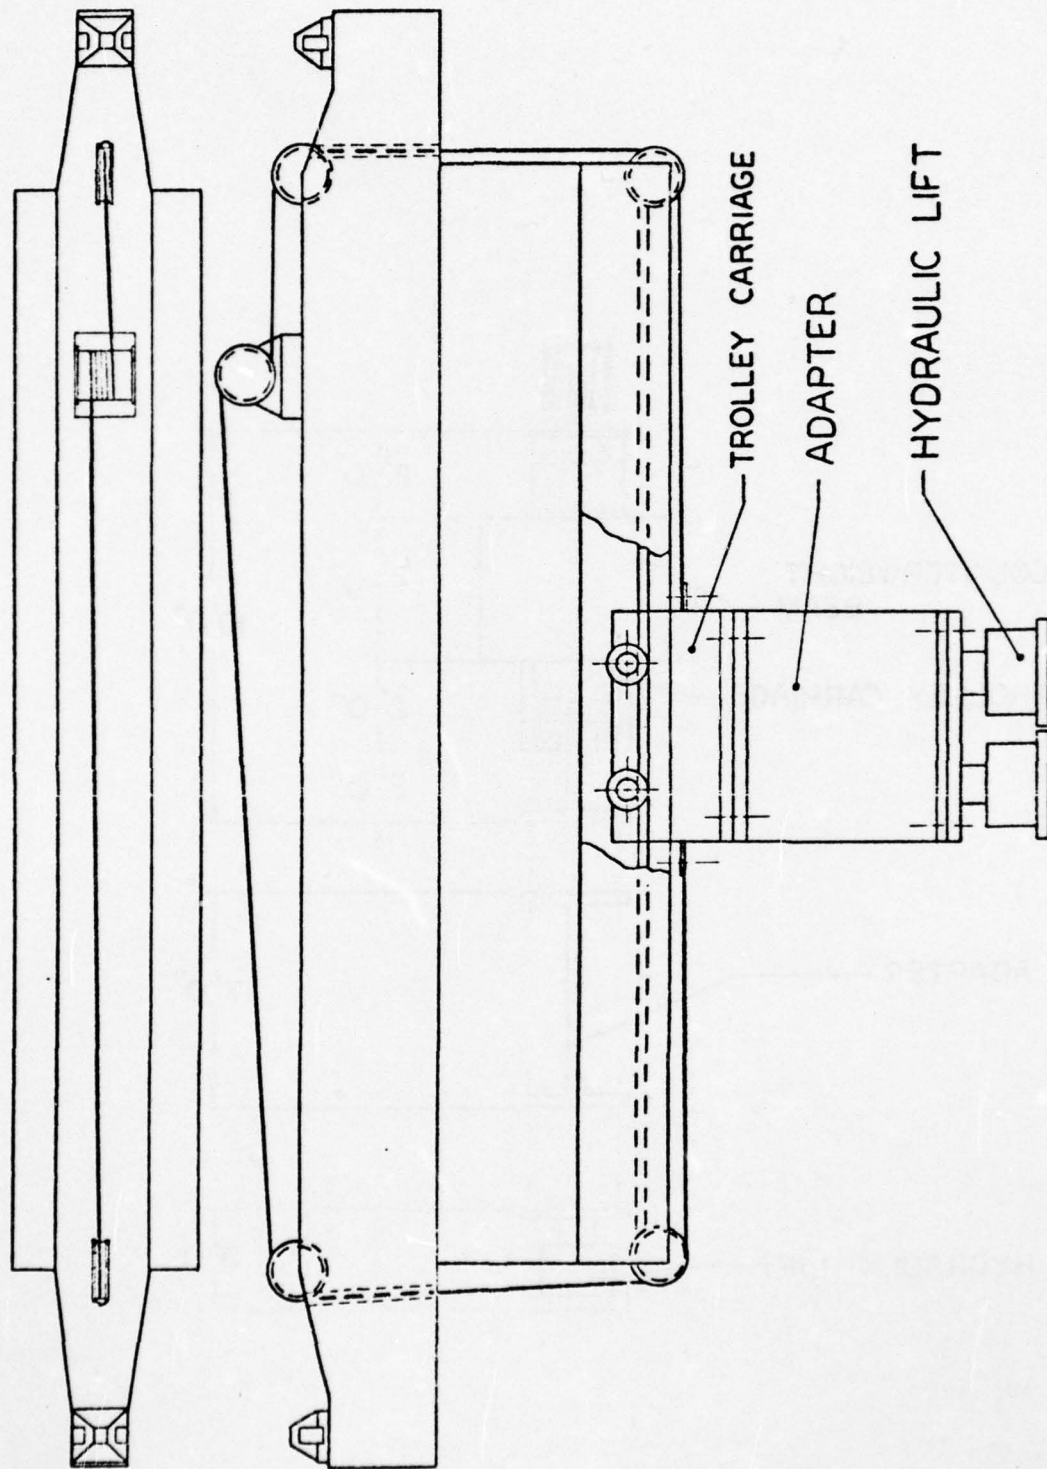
Counterweight Beam With Winch/ Trolley Carriage - Elevation & Plan
